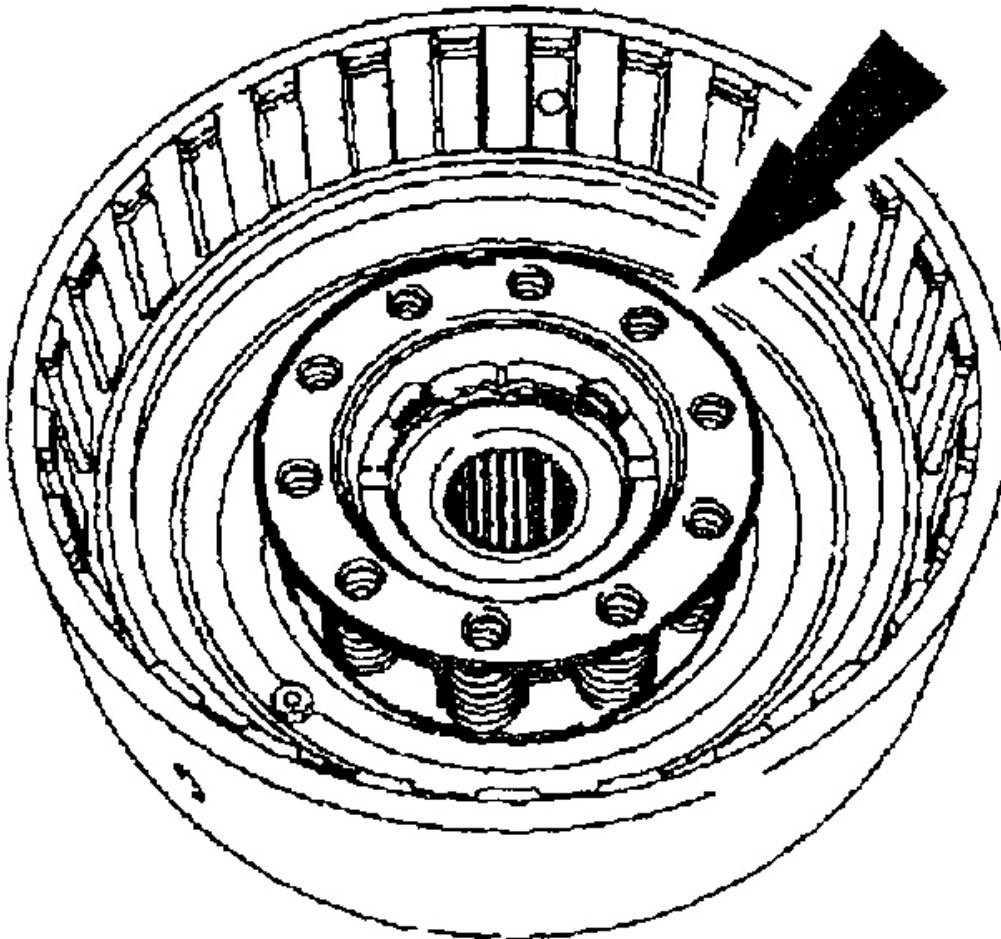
Removing Forward Clutch Piston Retaining Ring
